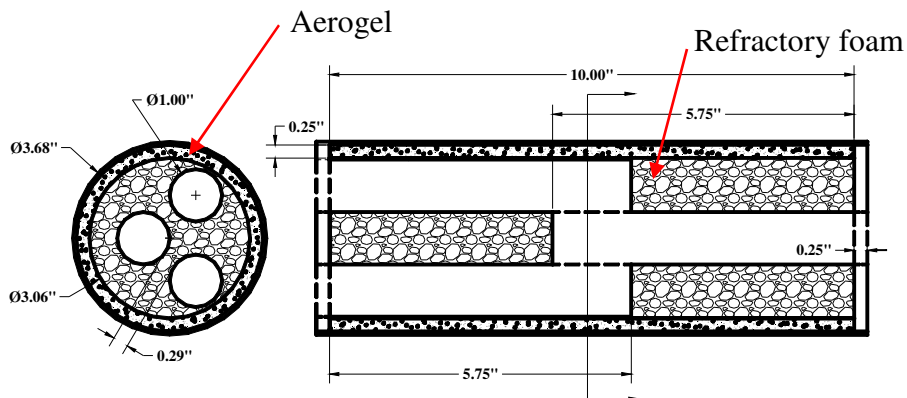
Drawing for *nylon cylinder w/ 3-hole foam* silencer design.
